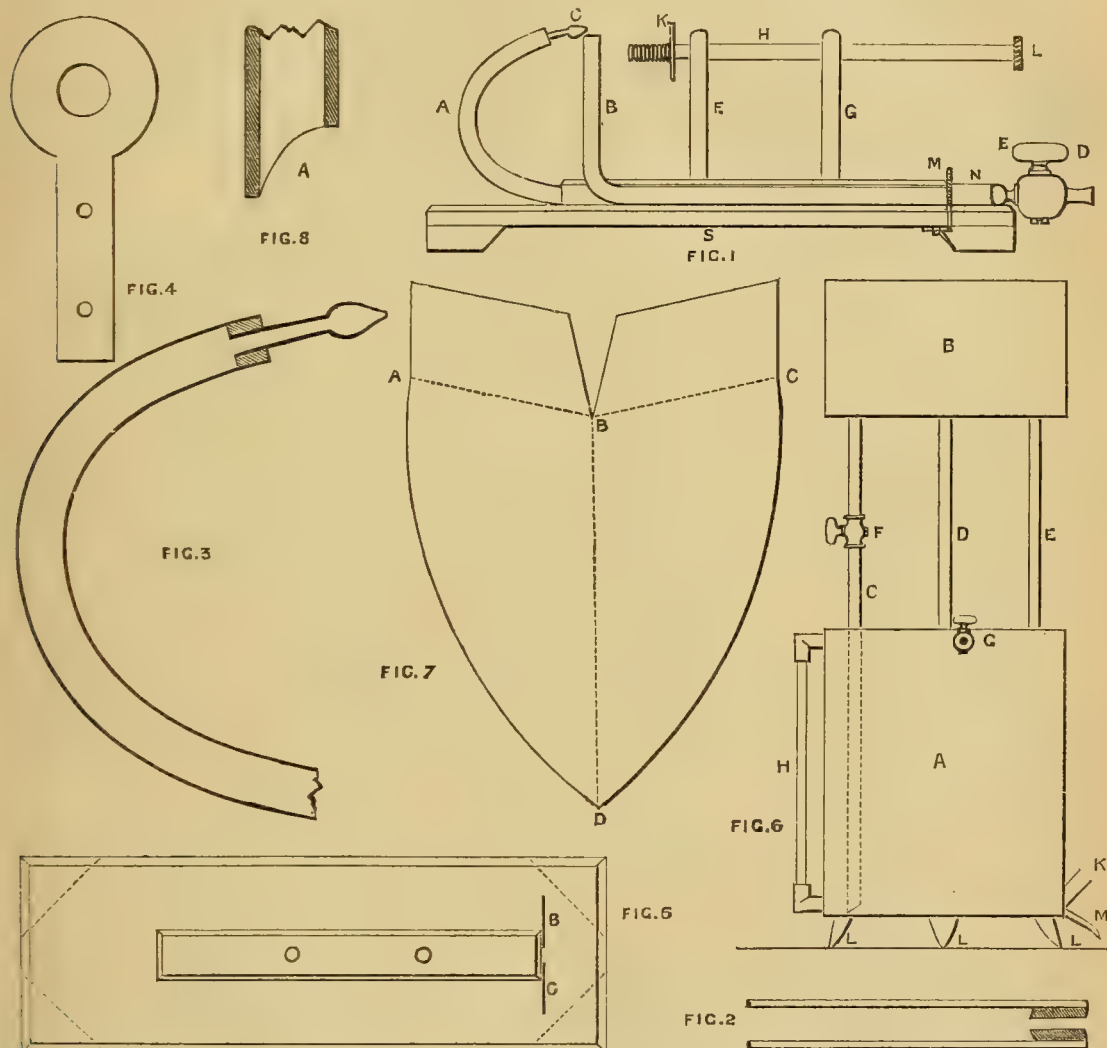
SIDE ELEVATION OF LIME JET, ONE-THIRD FULL SIZE. FIG. 2.—OXYGEN TUBE PLUGGED AND DRILLED. FIG. 3.—TUBE BENT IN SEMICIRCULAR FORM. FIG. 4.—SHAPE OF PIECES OF SHEET BRASS. FIG. 5.—WOODEN STAND FOR JET. FIG. 6.—ELEVATION OF GASHOLDER, SCALE $1\frac{1}{2}$ IN. TO 1 FT. FIG. 7.—PATTERN FOR FEET OF GASHOLDER.
